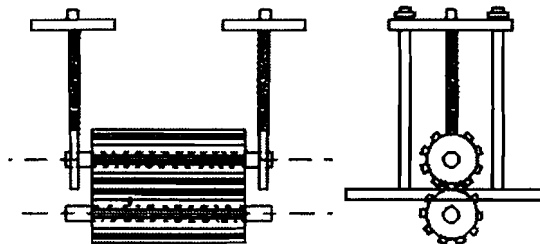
Elevation and side view of the feeding and breaking device in machine for showing the overlap of the cylinder surface tooth.
